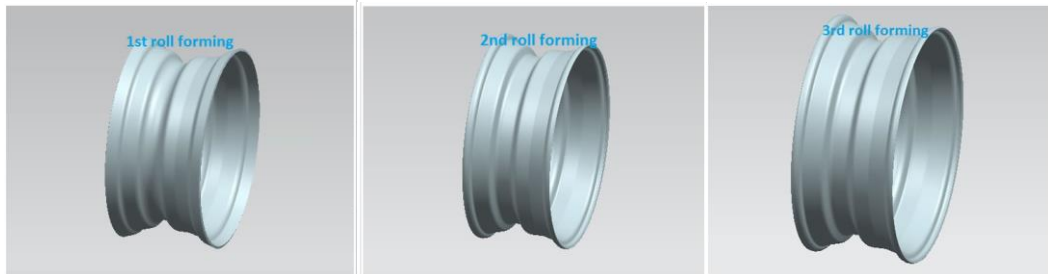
The three roll formings of the rim, source: LittleDuck, wheelmachinery
